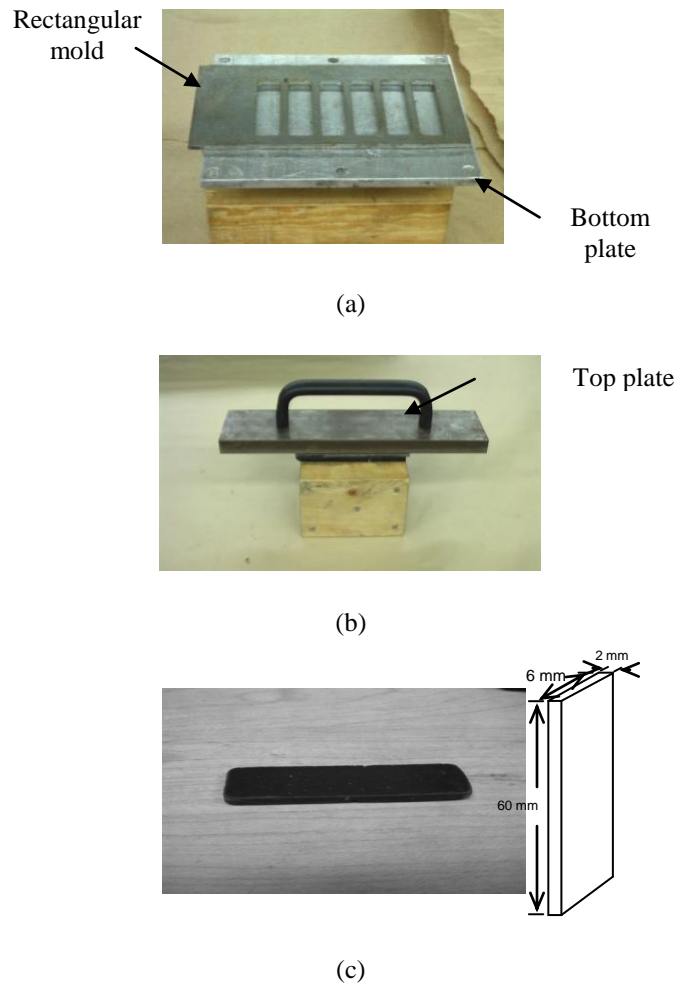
(a) Flat mold, (b) Molding assembly, and (c) Specimen configuration
